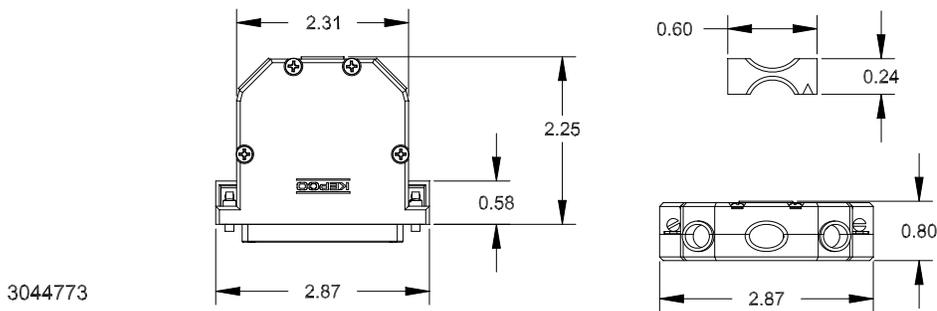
KIT 219-0645 ADAPTER ASSEMBLY, OUTLINE DIMENSIONS
